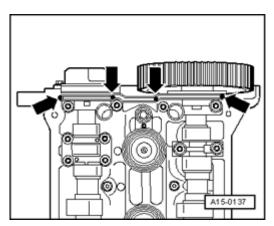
Double Bearing Cap Contact Surface Sealant Application Areas
